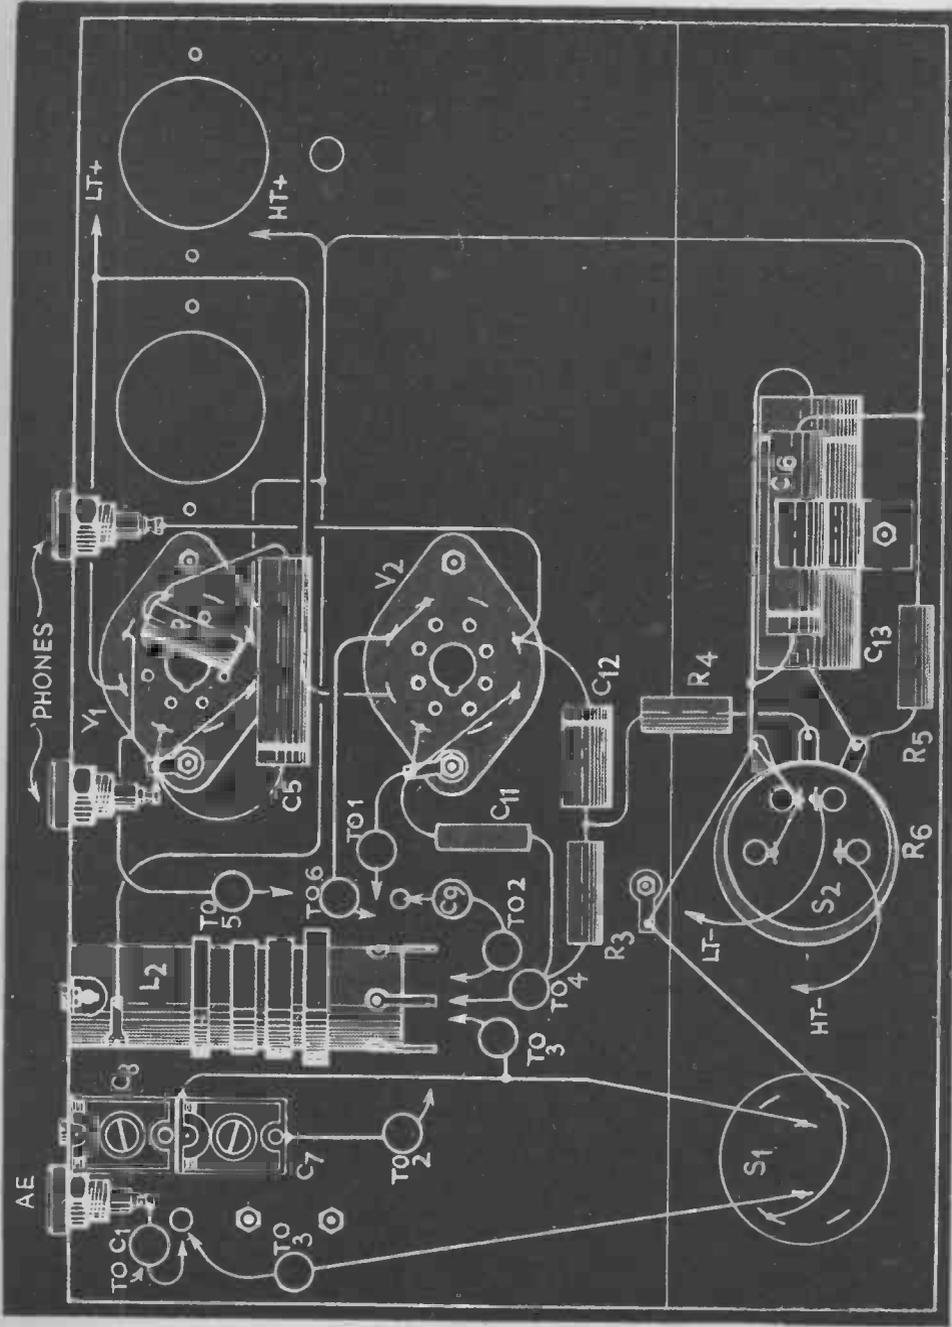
UNDER-CHASSIS VIEW OF THE TWO-VALVE RECEIVER
